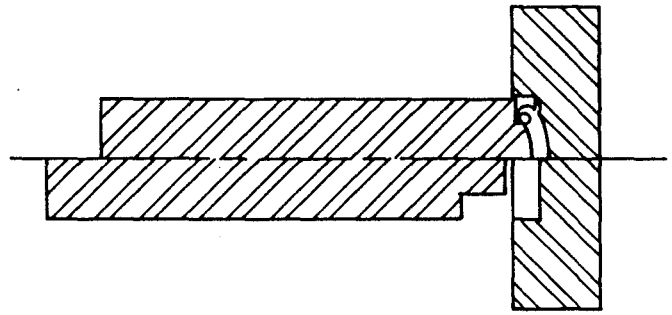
A—Typical Flashtrap Joint Design Bar to Plate Weld
